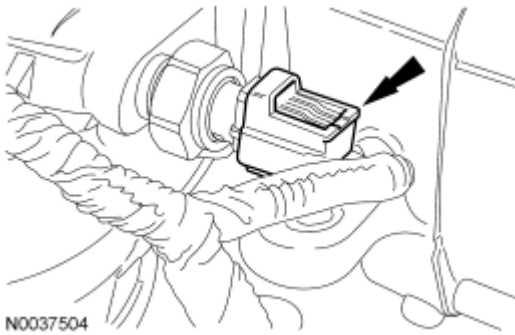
Locating Transaxle Pressure Switch Electrical Connector
